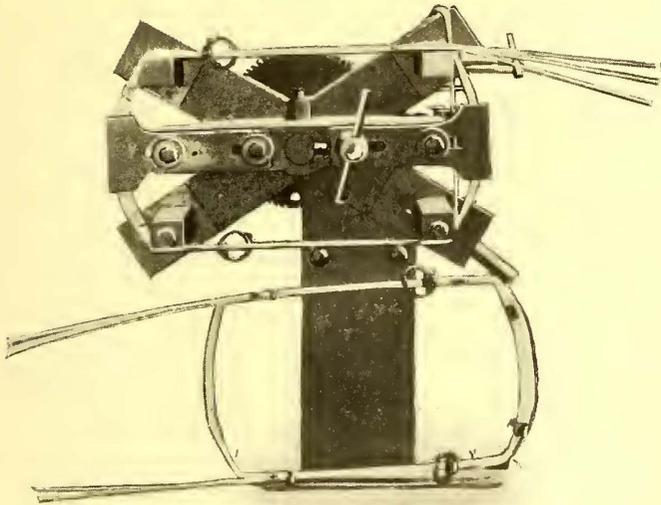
ARMATURE COIL WINDER FOR WESTINGHOUSE 56 MOTORS. COIL JUST COMPLETED
